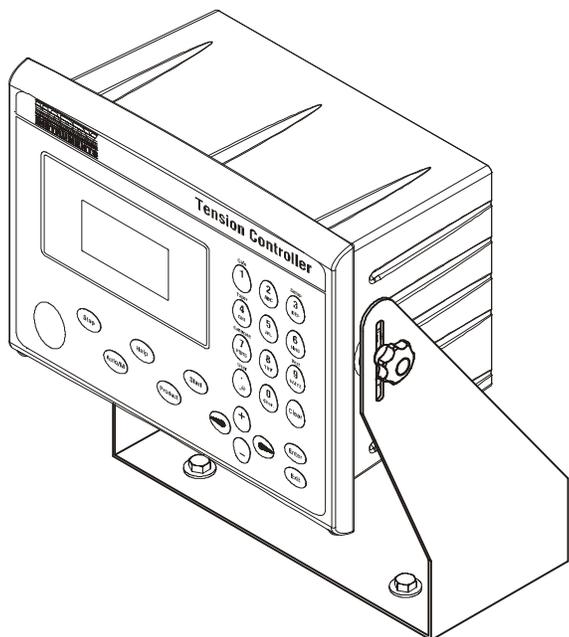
TENSION CONTROLLER INSTALLED IN A SWIVEL MOUNT
